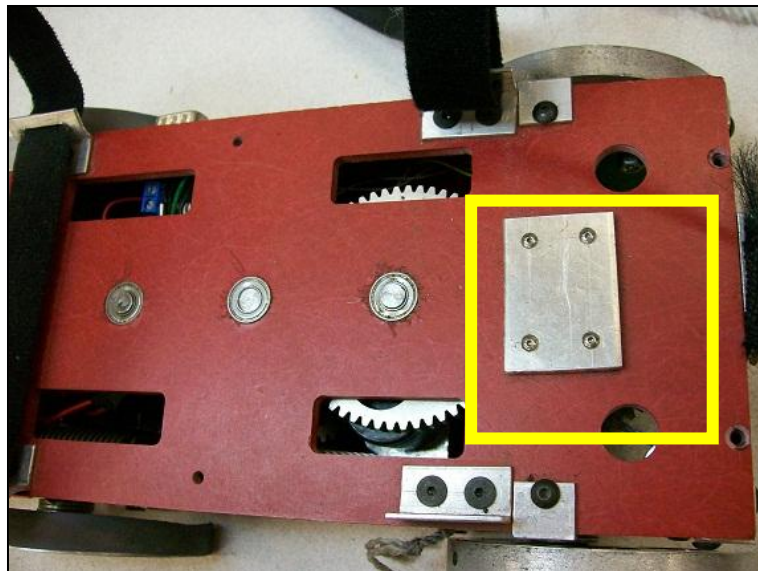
Aluminum plate on top of the GEMS frame cover preventing unmeshing of miter gear set
